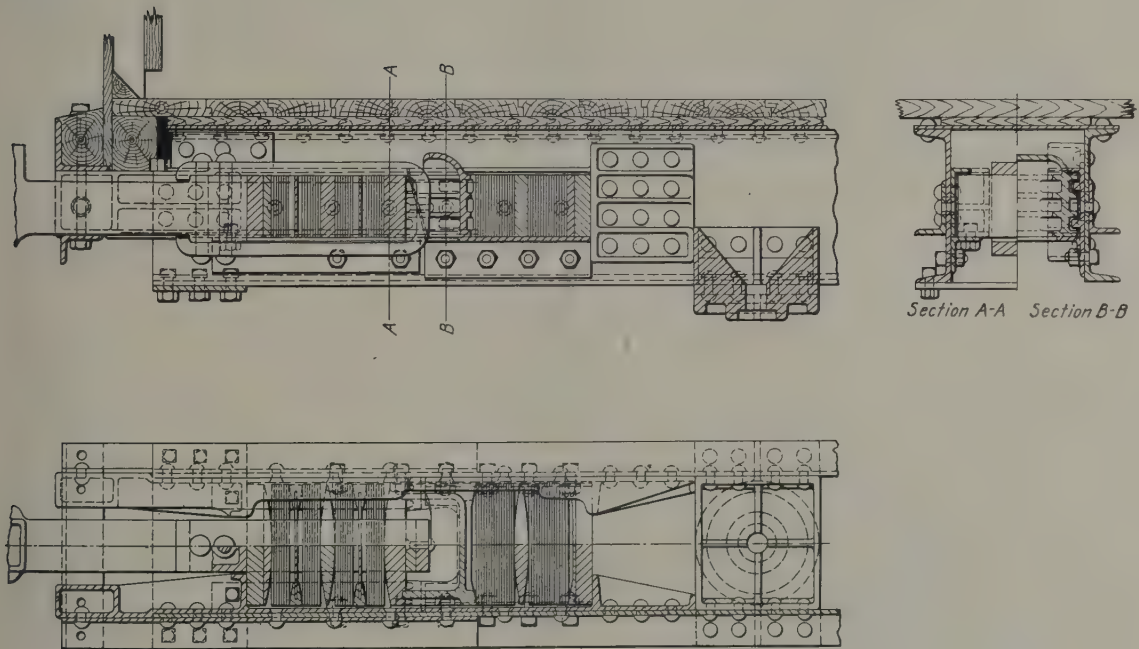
Waugh Auxiliary Buffer in Combination with Waugh Draft Gear.
